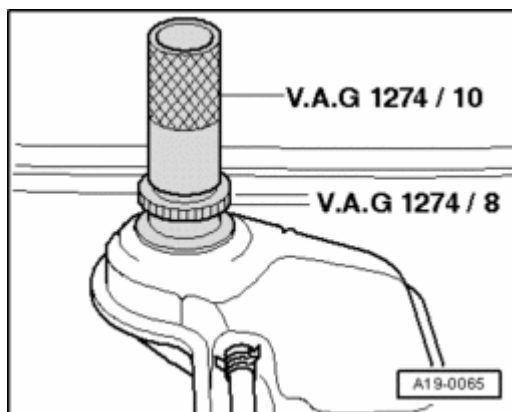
Connecting Adapter For Cooling System Tester V.A.G 1274/10 To Adapter V.A.G 1274/8
